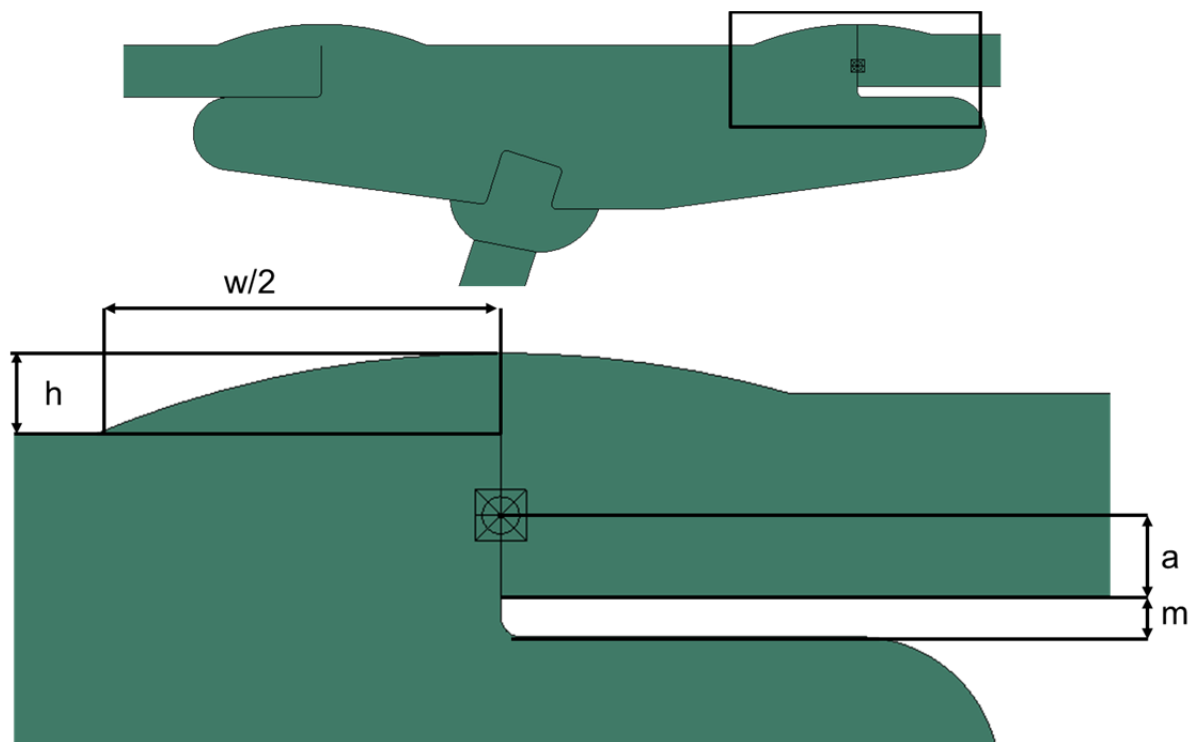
Definition of the geometry dimensions. Weld cap height is h ; weld cap width is w ; crack height is a and misalignment is m .
